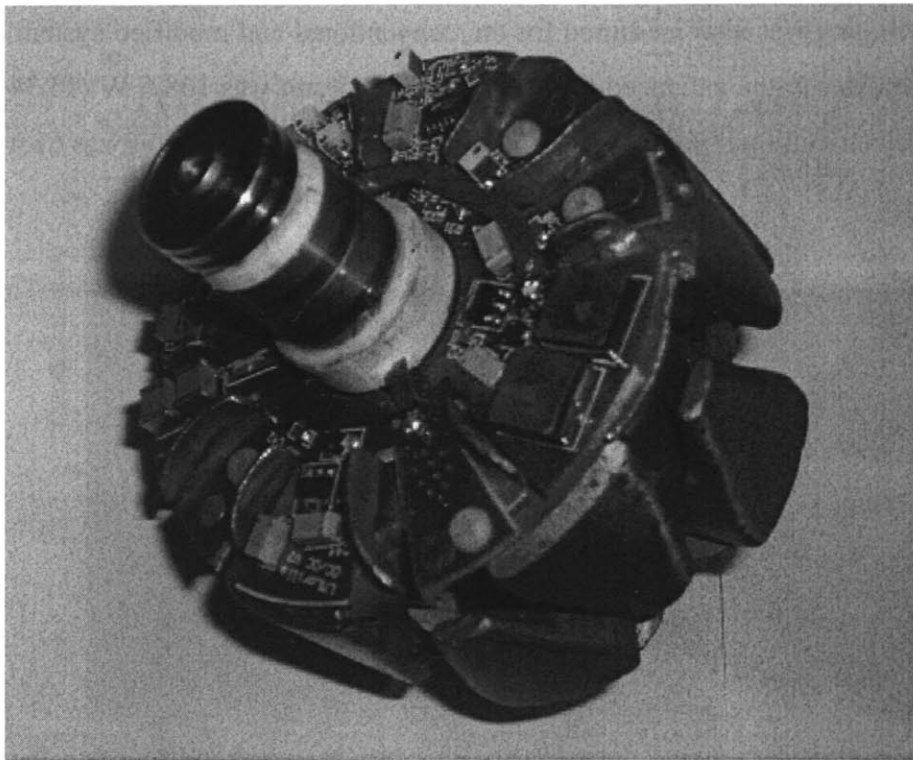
Pressed rotor claws with foil field winding and rotating converter.
